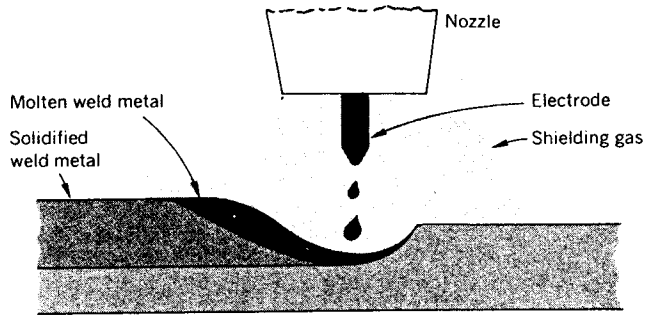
Gas Metal-Arc Welding, GMAW (1)
